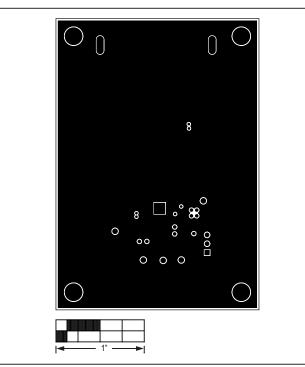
MAX20051 EV Kit PCB Layout—Solder Side
